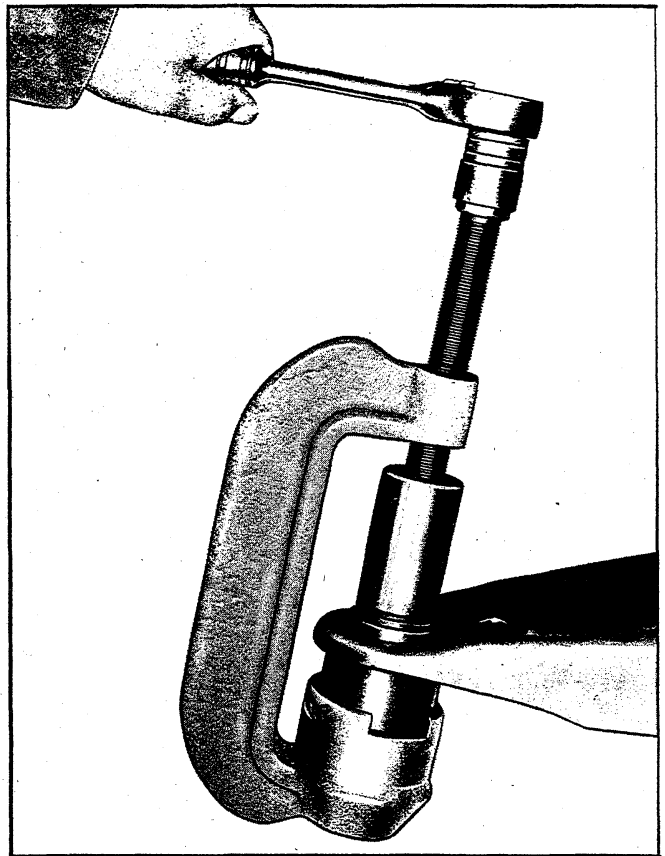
Removing Lower Ball Joint - Chevelle & Camaro
